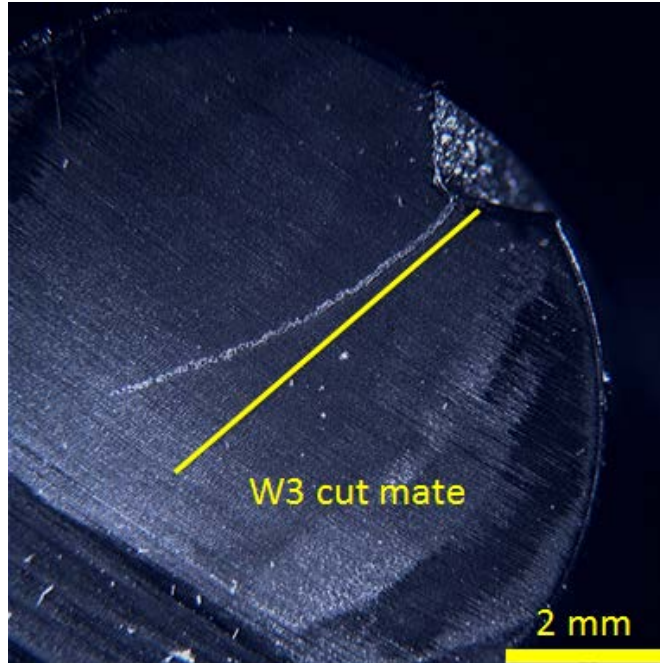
The failed W3 specimen in X52 welded steel series.
